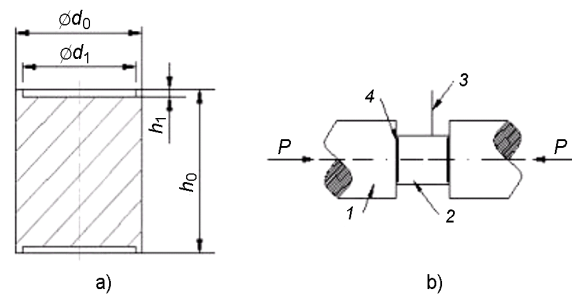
Schematic drawing of the specimen and hot compression experiment (a) Test Specimen (b) Compression diagrammatic sketch. 1-Pressure head 2-Specimen 3-Thermocouple 4-Graphite
